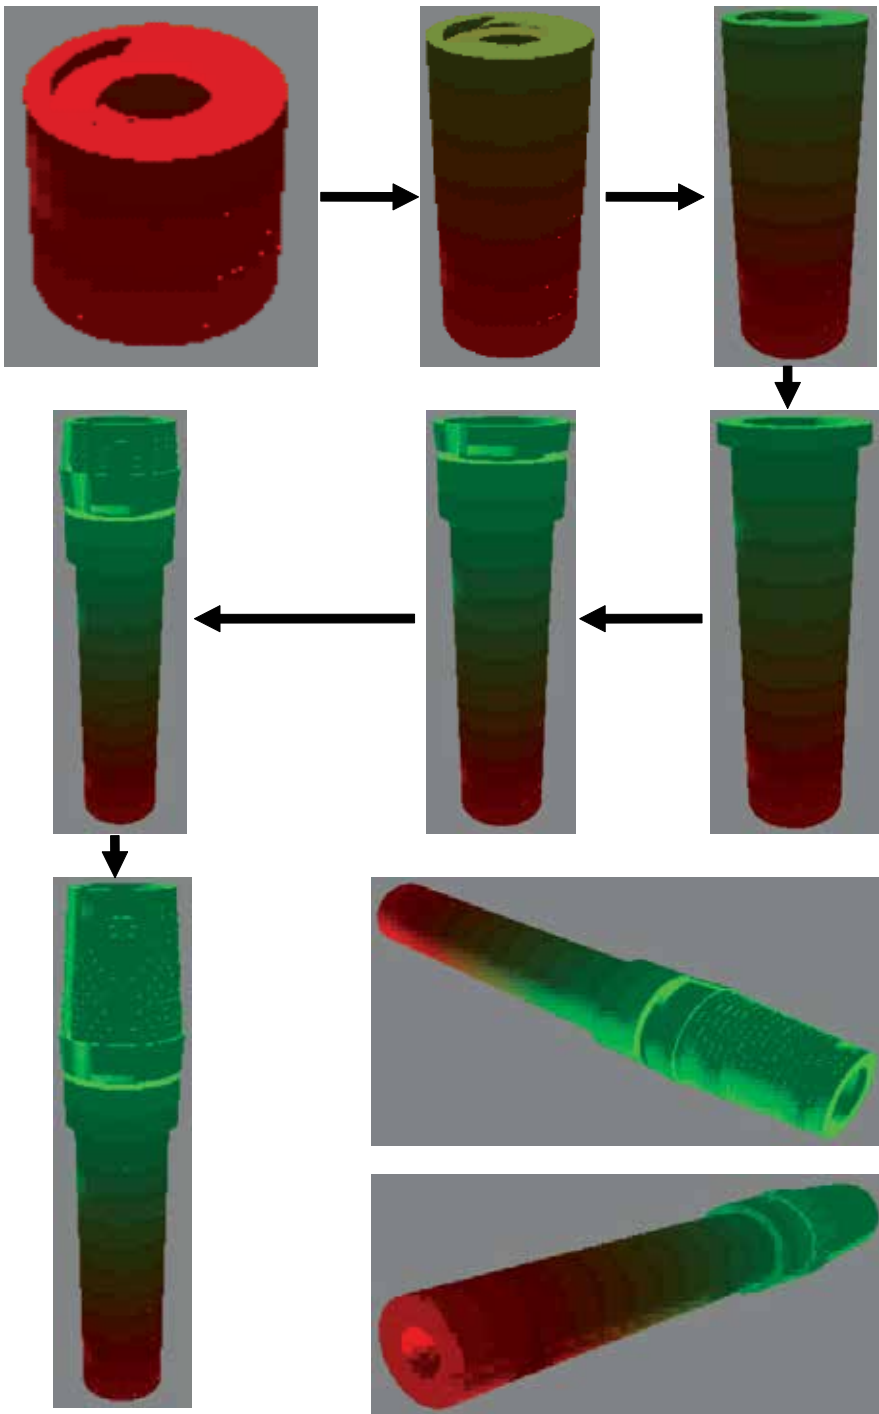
Digital fabrication of a multi-material prototype of a dental implant assembly
